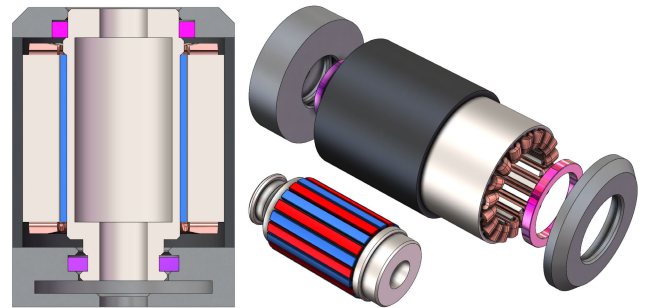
The mechanical structure of the direct-drive motor includes: the frameless motor, the bearing, the encoder, and the housing.
